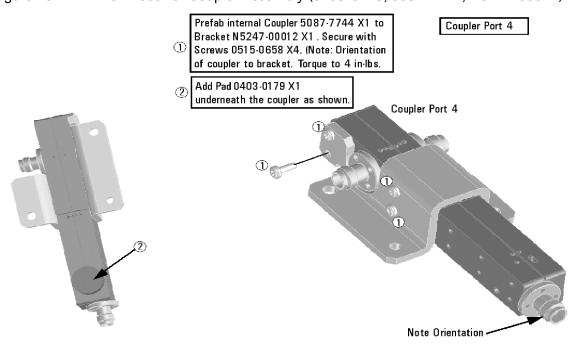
A31 Receiver Coupler Assembly (0403-0179, 5087-7744, N5247-00012)
